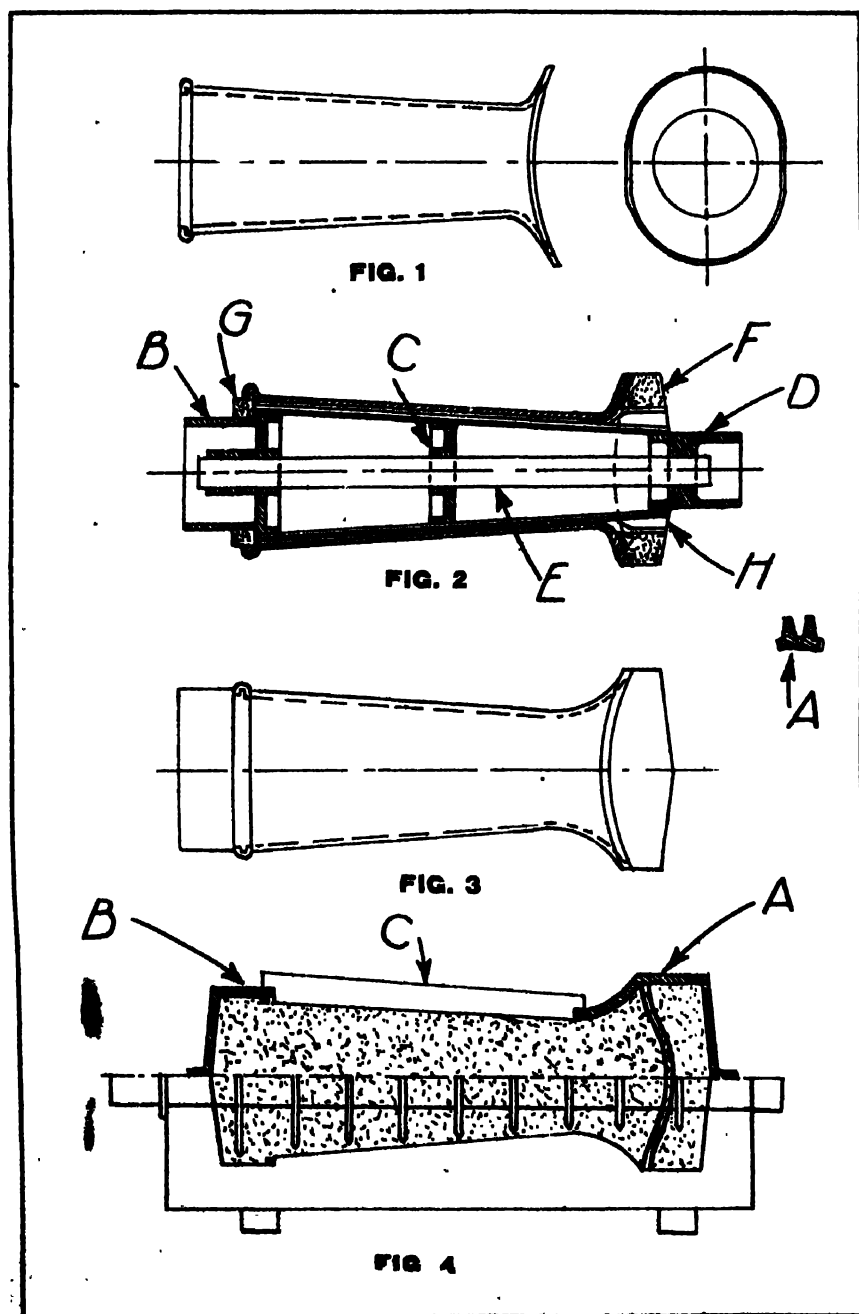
SIDE AND END VIEW OF TYPICAL SMOKE STACK FIG. 2—LONGITUDINAL SECTION OF CASTING WITH CORE IN PLACE FIG. 3—SLIGHTLY DIFFERENT STYLE OF SMOKE STACK FIG. 4—THIS CORE IS MADE IN A HALF COREBOX, THE TOP OF THE ENDS FORMED IN SHELLS AND THE CENTER TOP SURFACE STRUCK OUT
